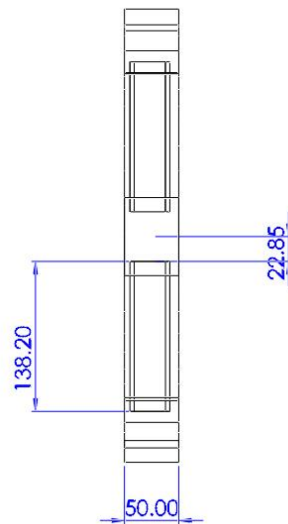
(c) : Dimensions of the geometry. The model was created based on the Airbus A320 narrow body cabin. All dimensions are in centimeters
